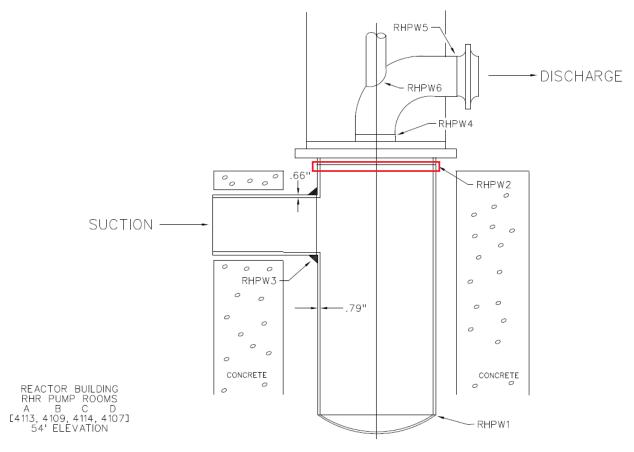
Weld 1-DP-202-RHP-W2 (Extracted from Reference DWG B-3)
